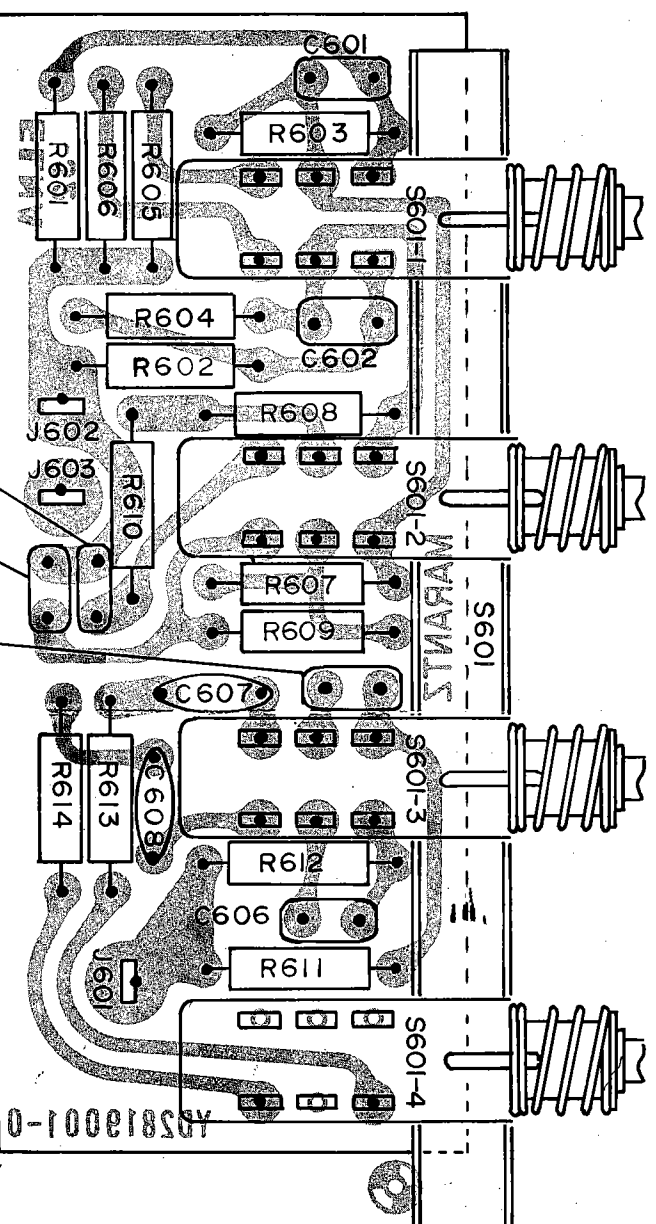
Loudness, High and Low Filter Switch Unit Assembly P600 Component Locations
